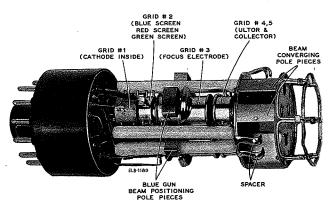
21 AXP22A Tricolor Kinescope Electron— Gun Assembly.
